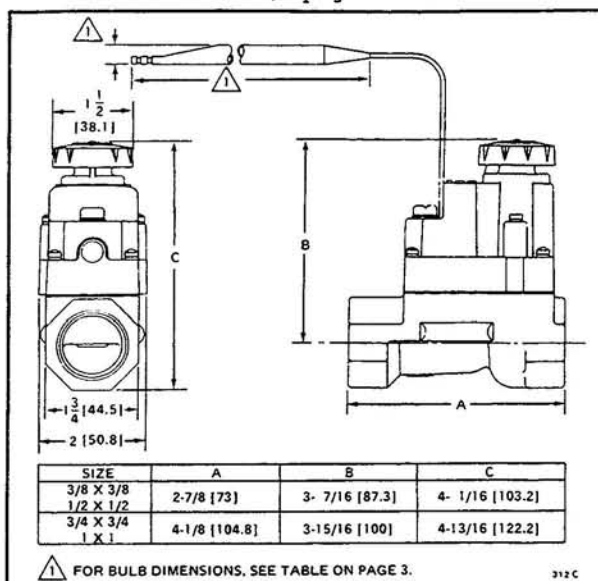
V5155A AND B DIMENSIONS, IN INCHES [MILLIMETRES SHOWN IN BRACKETS].
